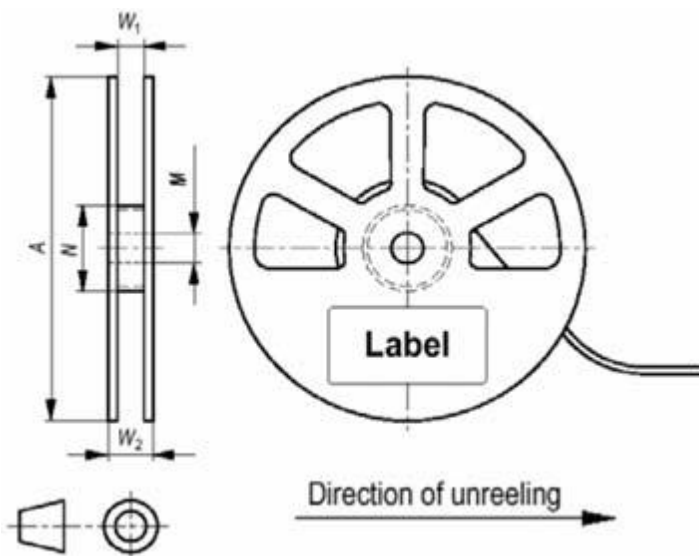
Reel dimensions. All dimensions in millimeters [mm].
